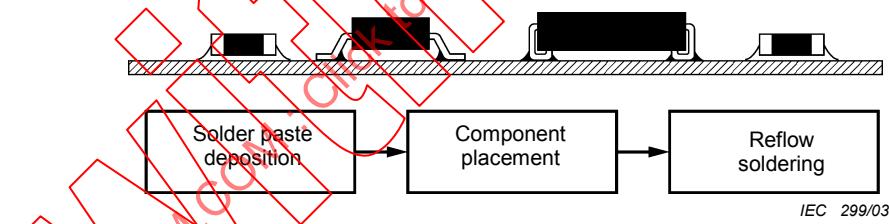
SM single-sided surface-mount assembly, reflow soldering only
